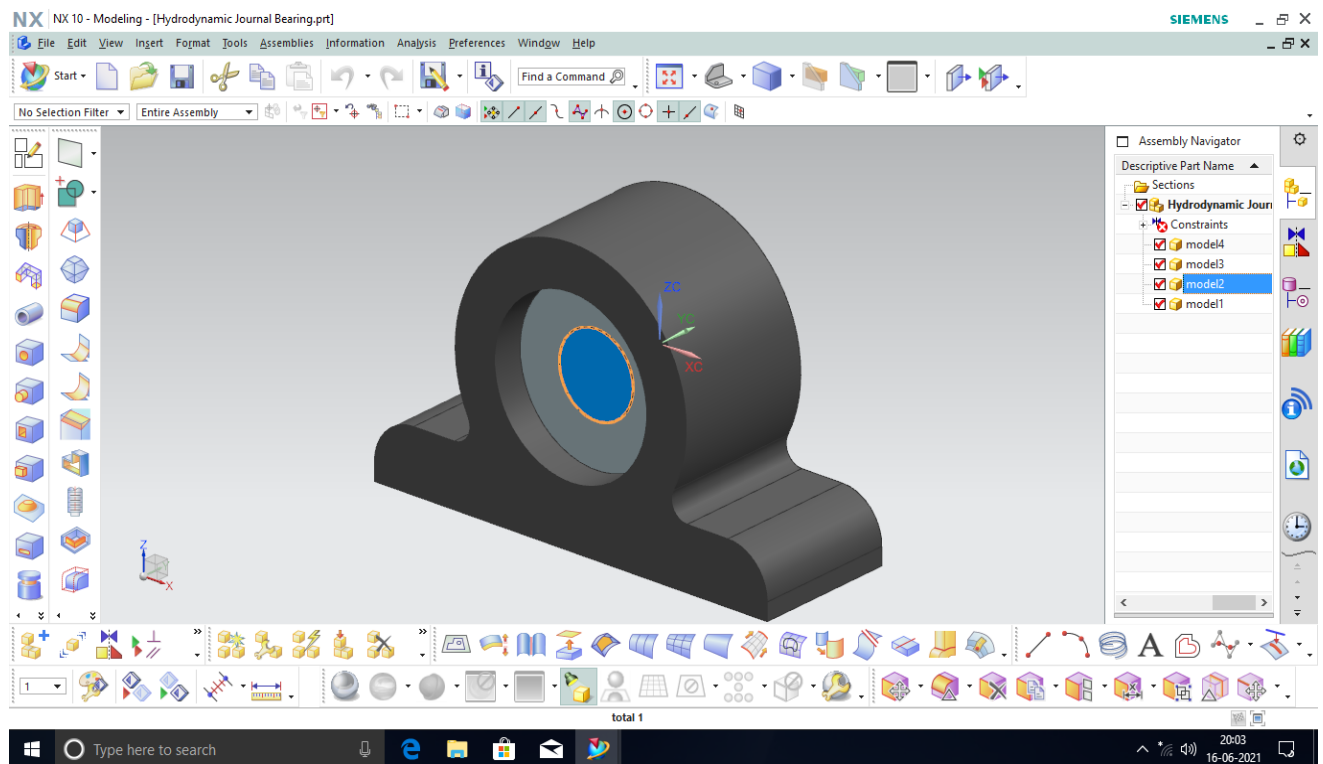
Assembly of Hydrodynamic Journal Bearing
